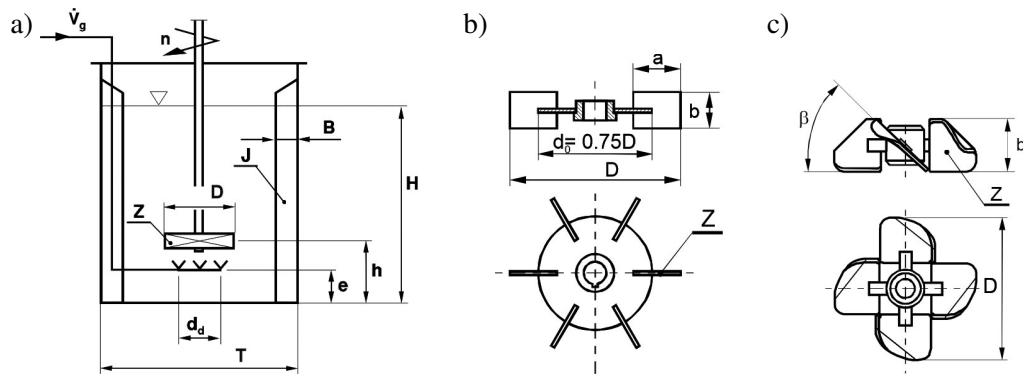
Geometrical parameters of the: a) agitated vessel; b) Rushton turbine impeller (RT); c) A 315 impeller
